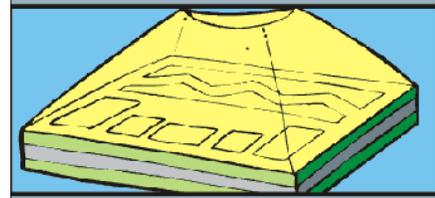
The photo die is used to expose the photo resist laminated on the material, fixing the photo resist in the form of the part positive [37].
